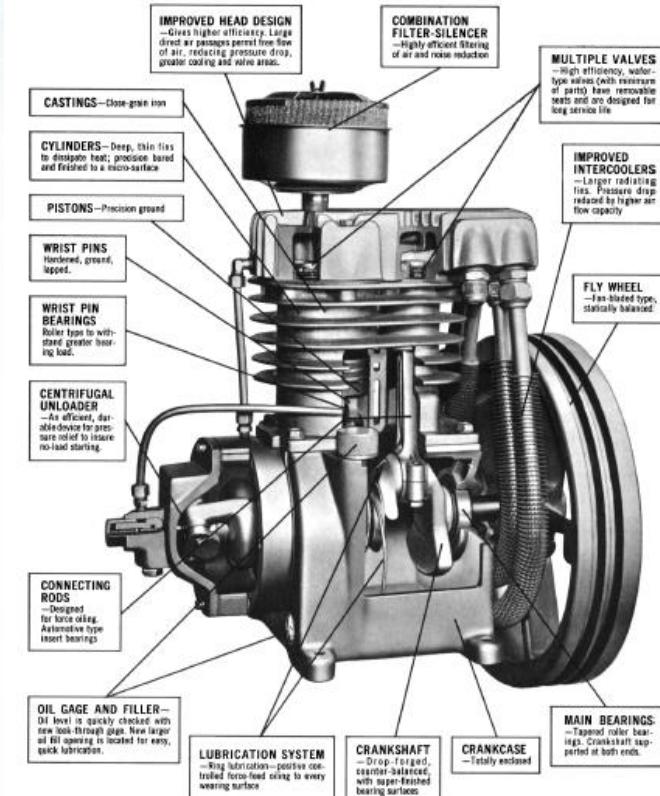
Design features of a piston-type compressor. (Courtesy of Kellogg-American, Inc., Oakmont, Pennsylvania.)
